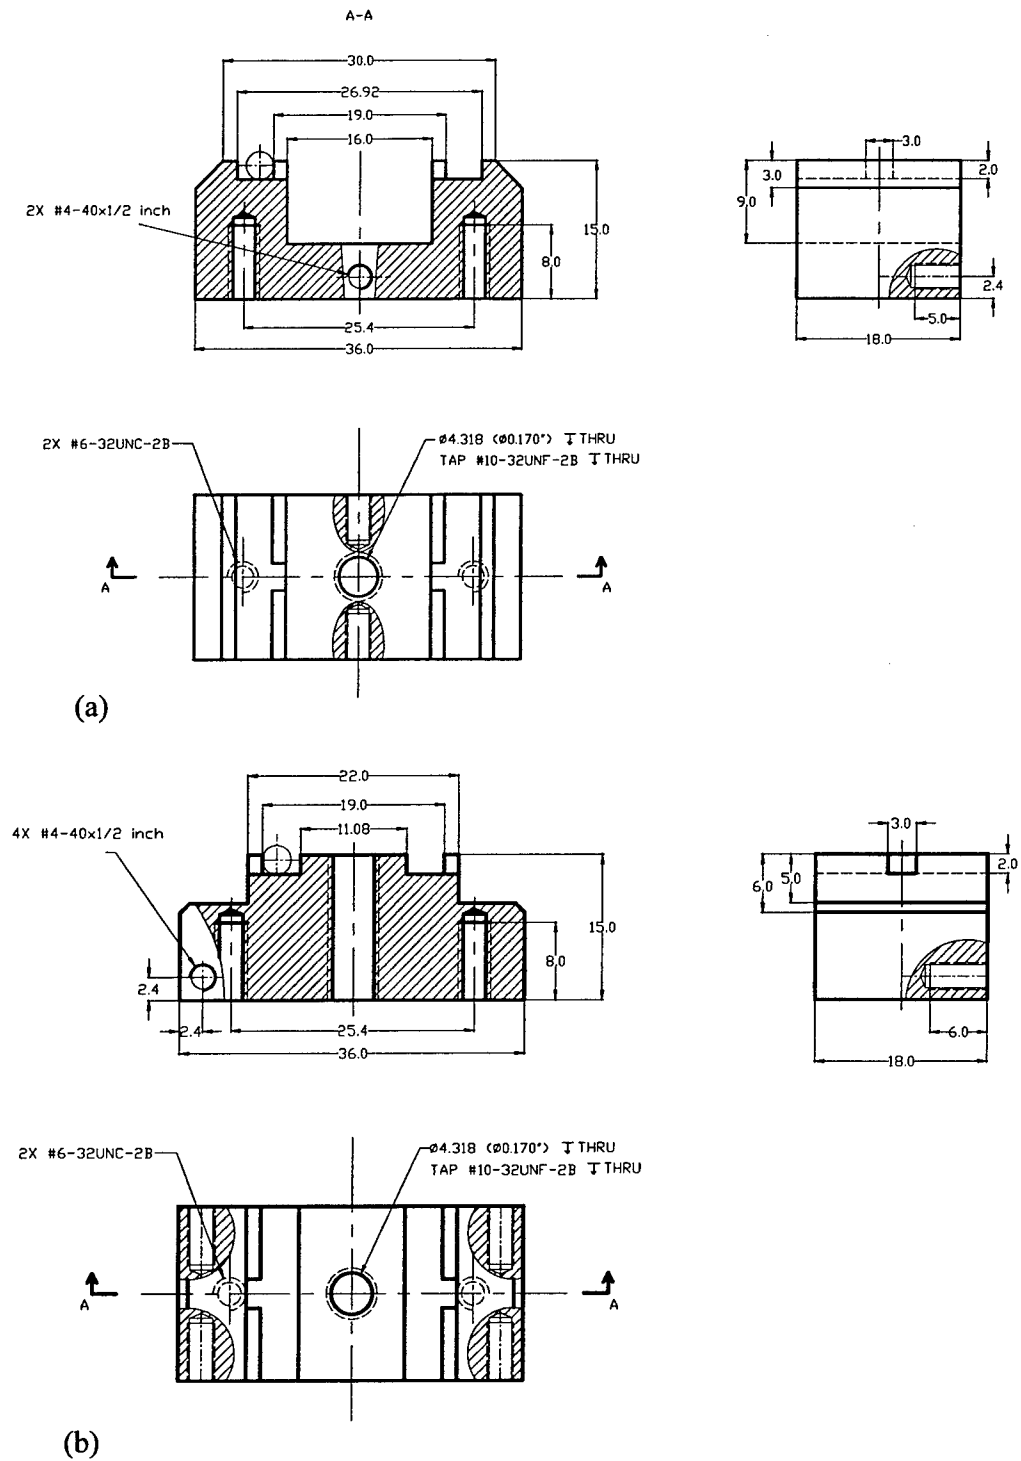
Design of rigid 4-point bend fixture, (a) Top fixture (b) Bottom fixture. Unit is in mm.
